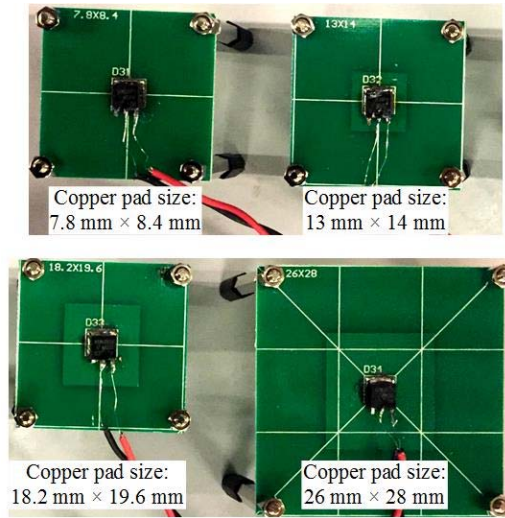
Photo of the built PCBs with different copper pad sizes. Source: [C1].
